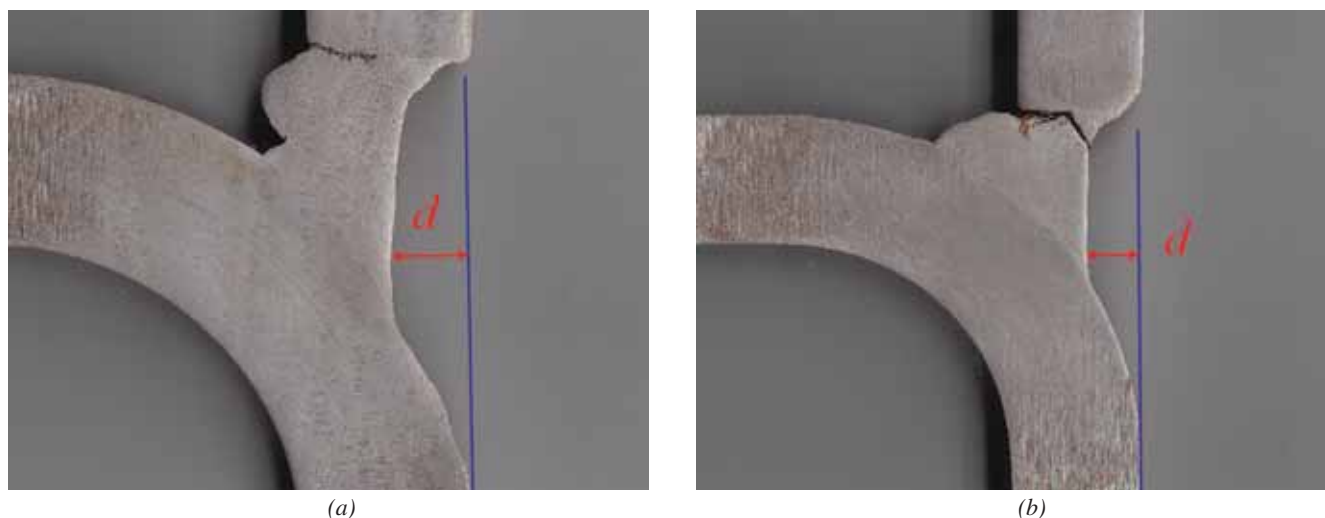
Example of PJP groove weld effective throat measurements from macroetch specimens: (a) PJP groove weld cross-section not fully cracked; (b) fully cracked PJP groove weld cross-section.
